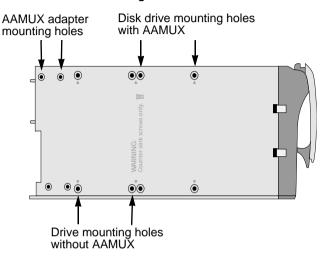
SATA drive mounted in a drive carrier with the AAMUX adapter
